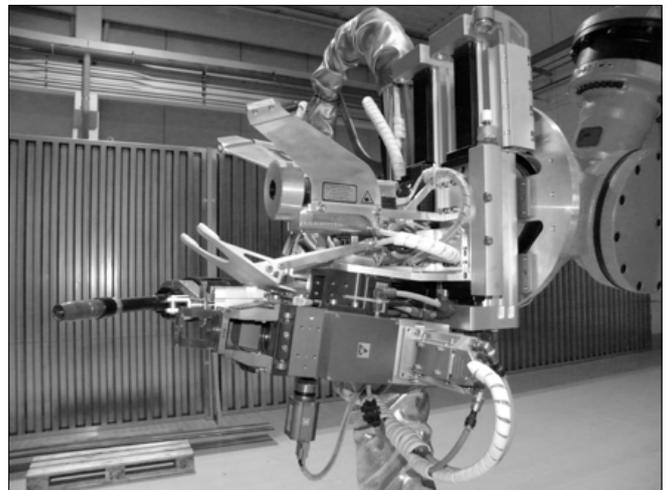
Process head arrangement with vision system in position. The vision system and Precitec welding head are mounted on pneumatic slides and are toggled depending on whether the system is performing a centring or a welding operation.
